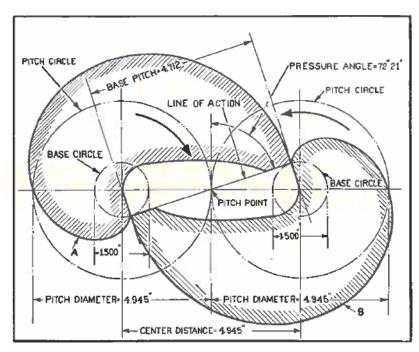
Involutes Applied to Two One-Tooth Gears, Indicating that the Involute Has Its Origin at the Base Circle, but Is Not Limited in Length.
